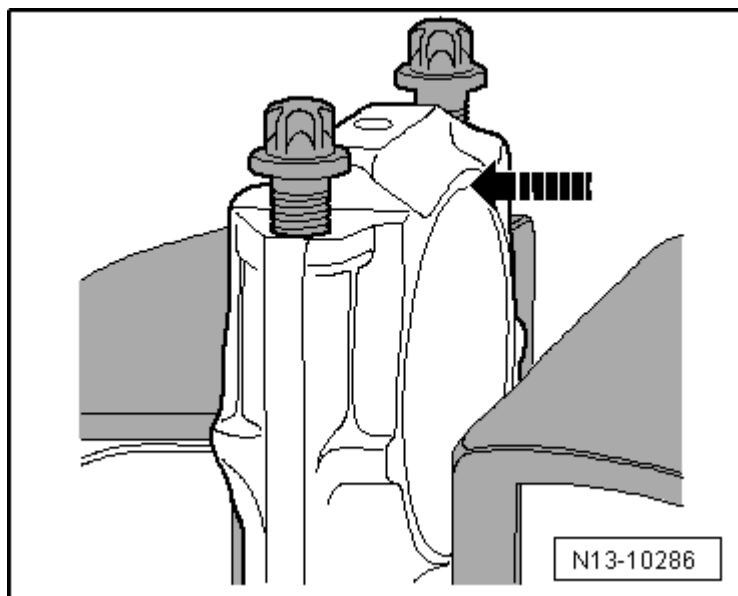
Identifying Direction To Carefully Tap Against Connecting Rod Bearing Cap
